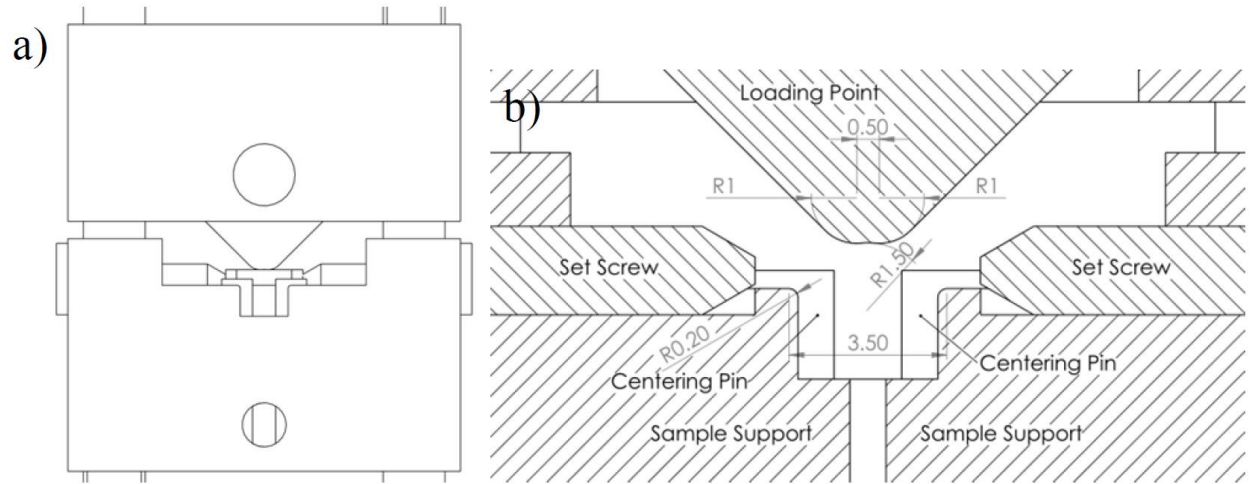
a) Schematic of 4-point bend loading fixture, with a centered bend specimen. b) cross sectional view of the loading fixture excluding the bend specimen. Included dimensions are in mm [104].
